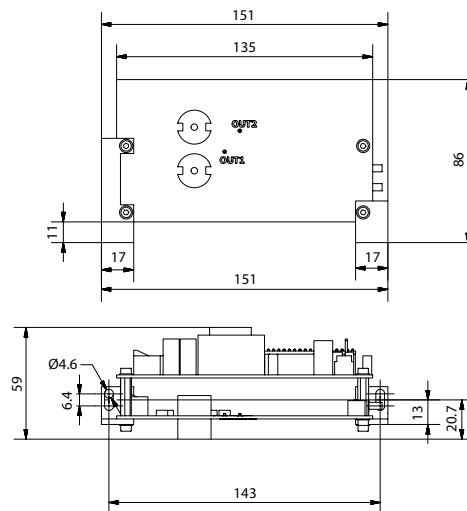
Outline drawing of OEM version DPB-3 and DPB-2.5 drivers with PS-5 power supply
